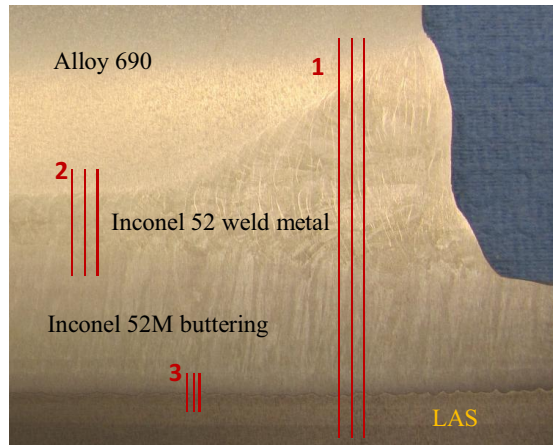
Schematic of the hardness measurements for the ENSA weld mock-up.
